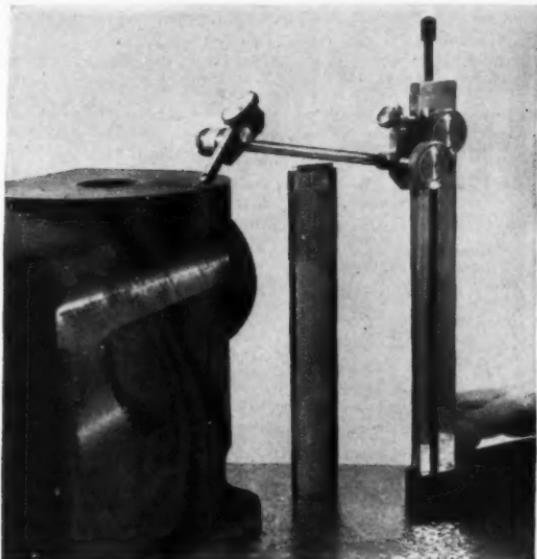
Another variety of transfer gage, fitted with dial indicator. It is used here to check a piece part.
